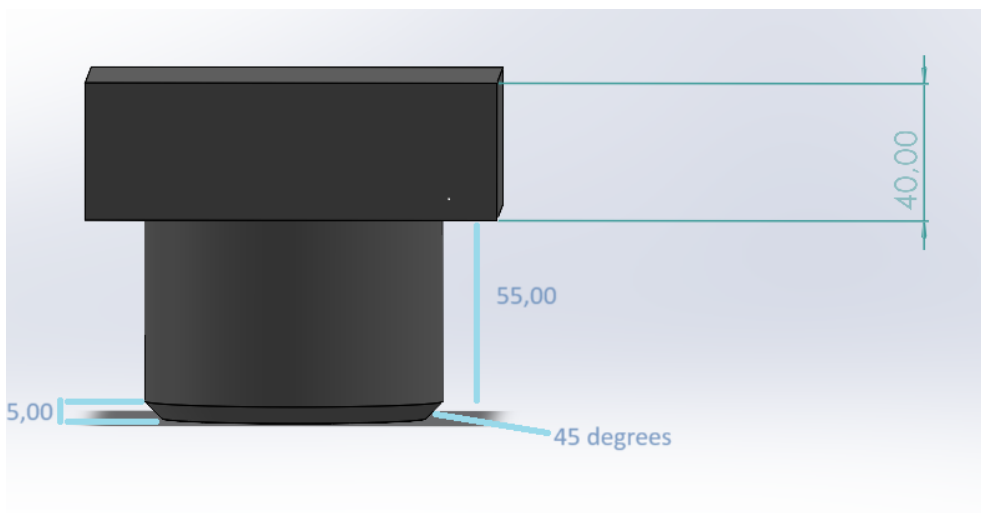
Dimensions in mm (unless specified otherwise) for the POM casting on top of the steel tube, seen from the side.
